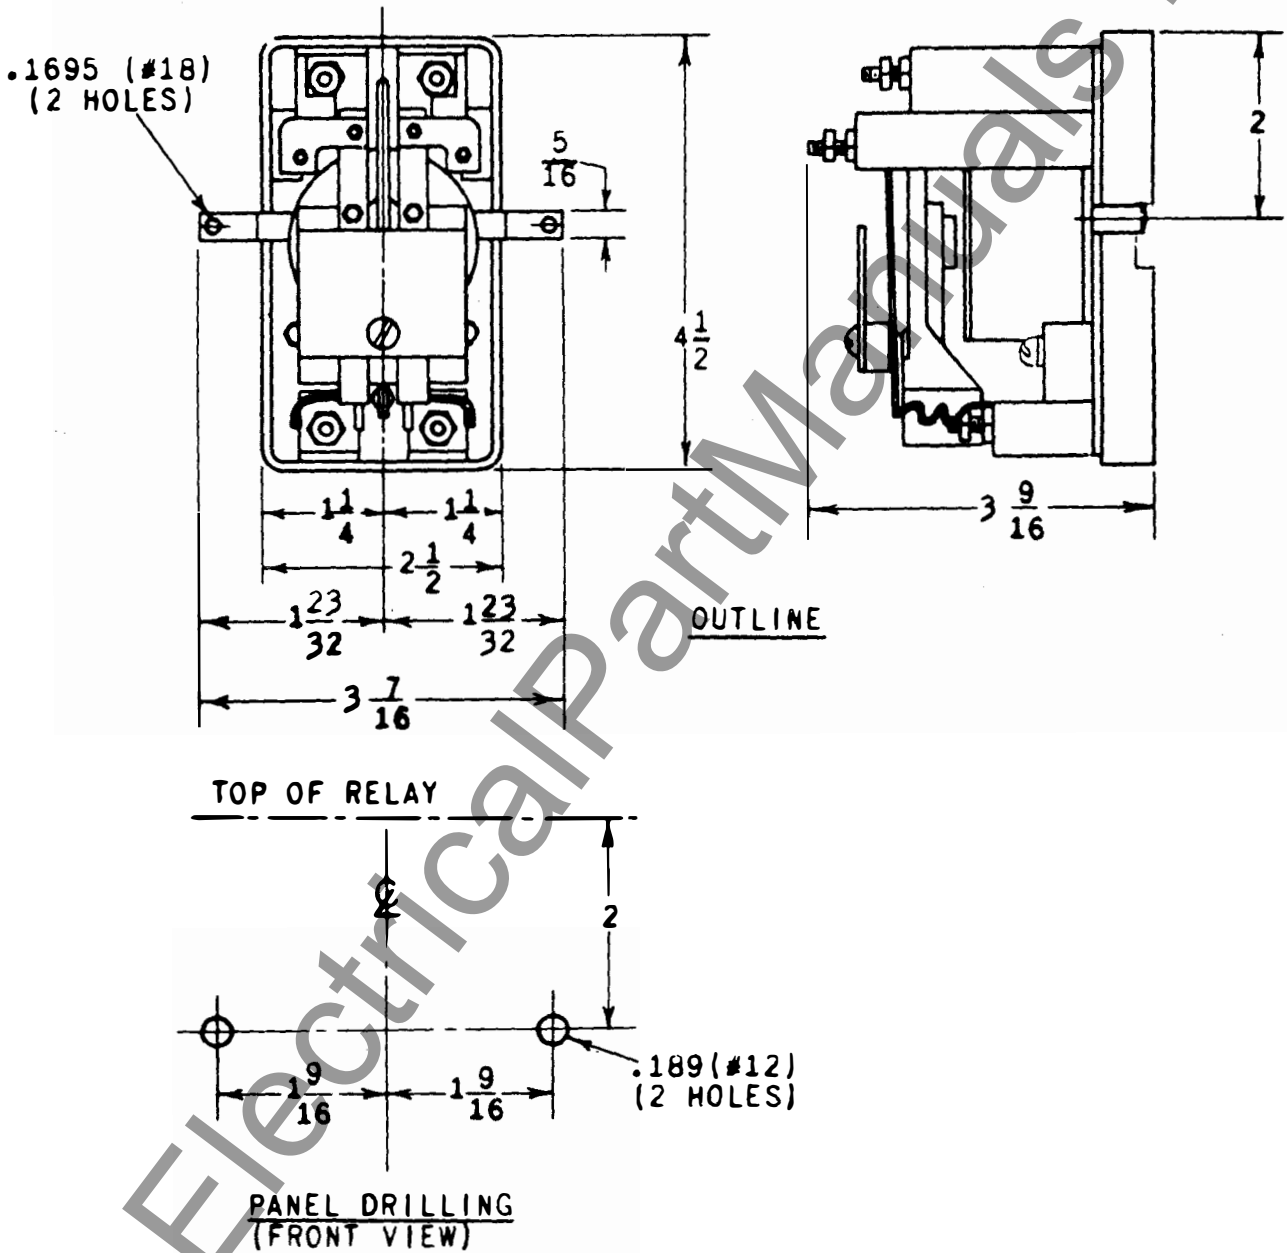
(0148A3971-000) Outline and Panel Drilling for Front Mounting of HGA17M and HGA17R Relays
